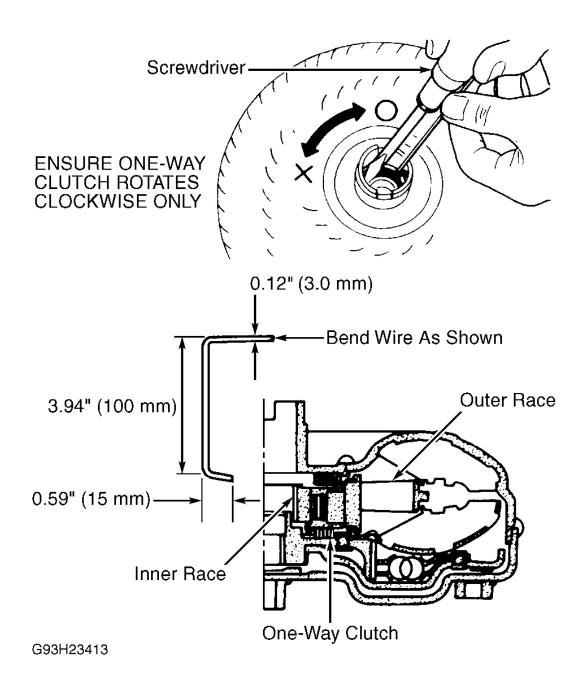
Checking Torque Converter One-Way Clutch Courtesy of NISSAN MOTOR CO., U.S.A.
